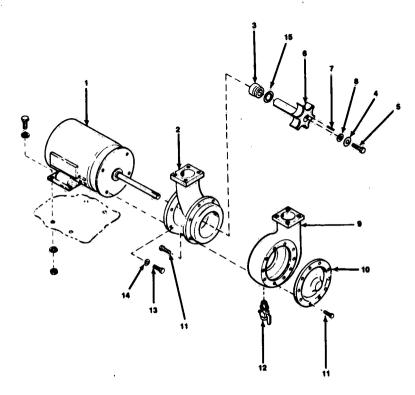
MOTOR AND PUMP ASSEMBLY.
